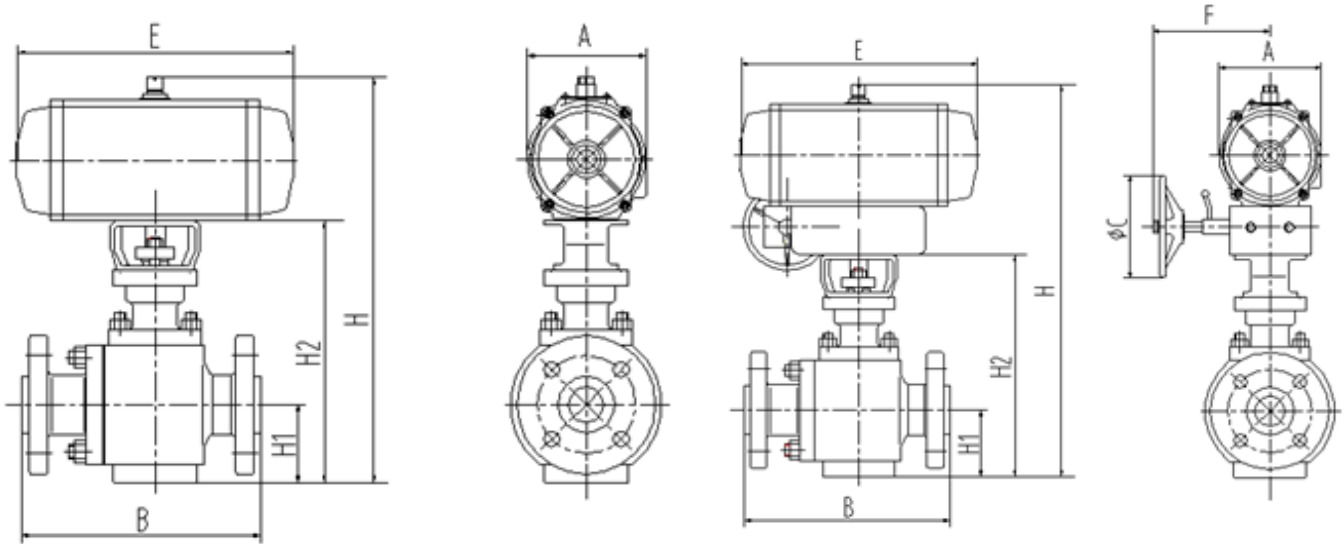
Overall Drawing With and Without Handwheel For 1/2" DN15~3"DN80
